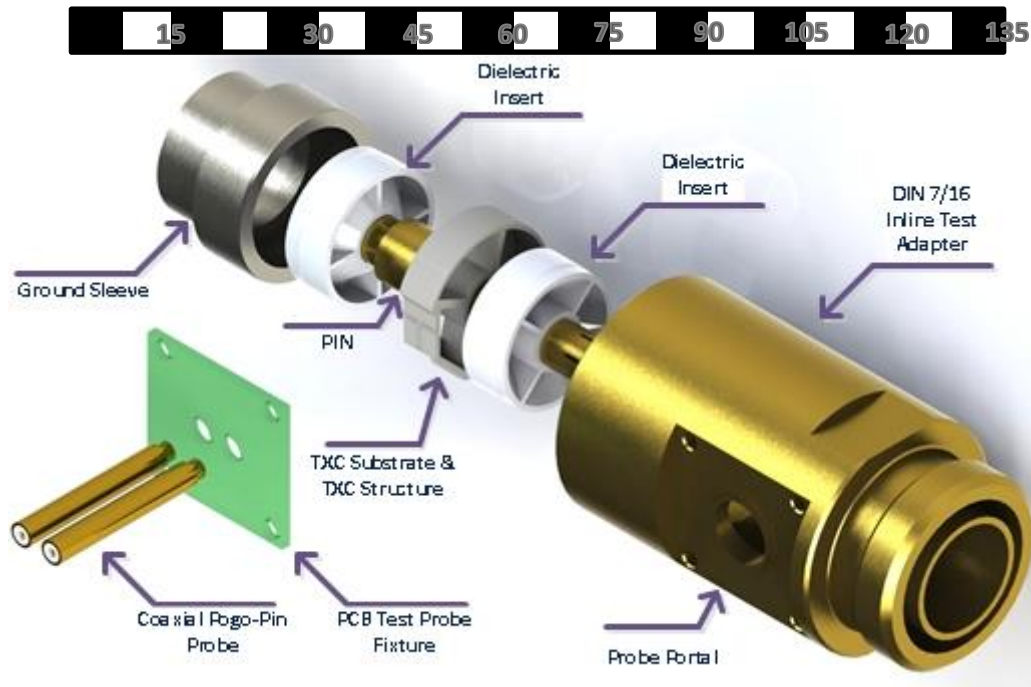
3D rendering of an exploded view of the components of the TXC test fixture. The scale is in millimeters.
